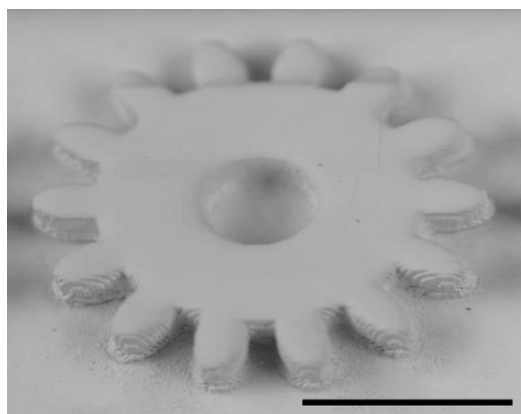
Si_3N_4 gearwheel produced via direct inkjet printing. Scale bar 5 mm. Reproduced with permission from [33].
